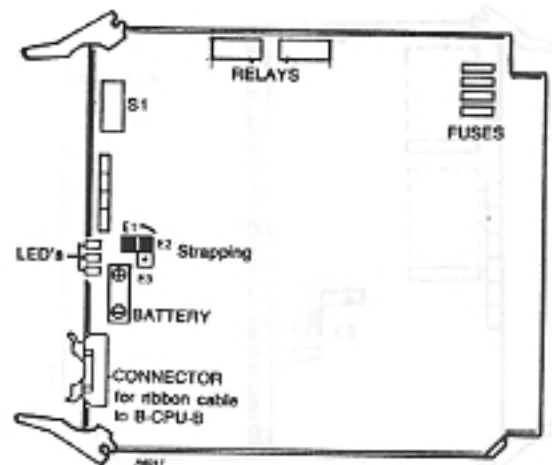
AUXILIARY ( B-AUX-A ) PCB
